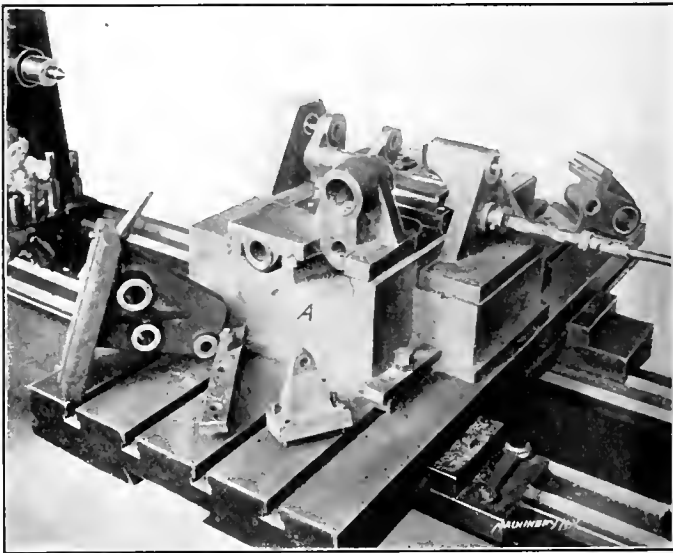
Fixture for Boring Head-stock, Foot-stock, and Carriage for Thread Milling Machines.
